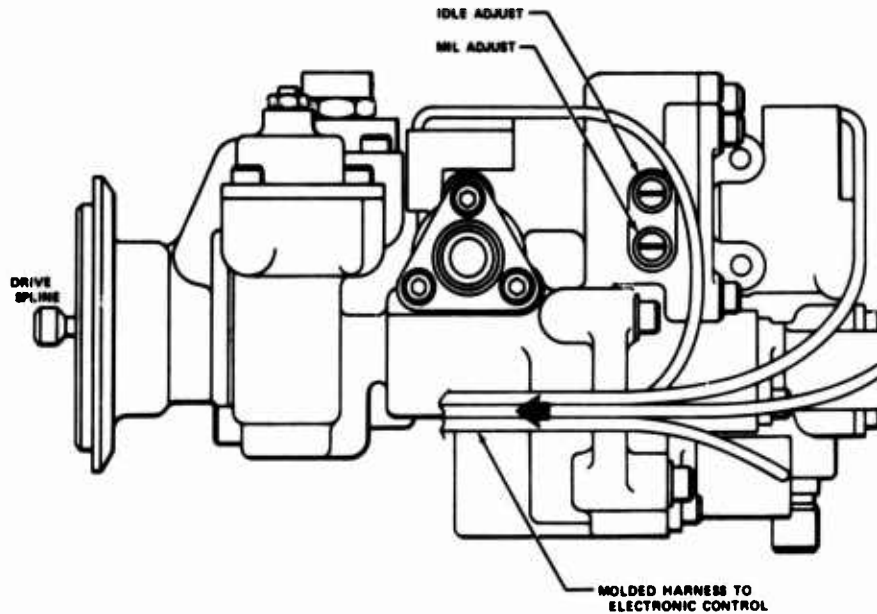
Cluster Gearbox Drive Fluid Controller and Fuel Pump/Alternator
